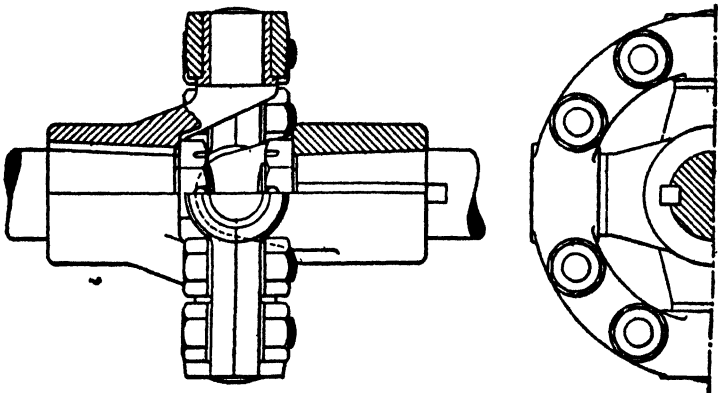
SPLIT-RING-TYPE OF UNIVERSAL JOINT.
